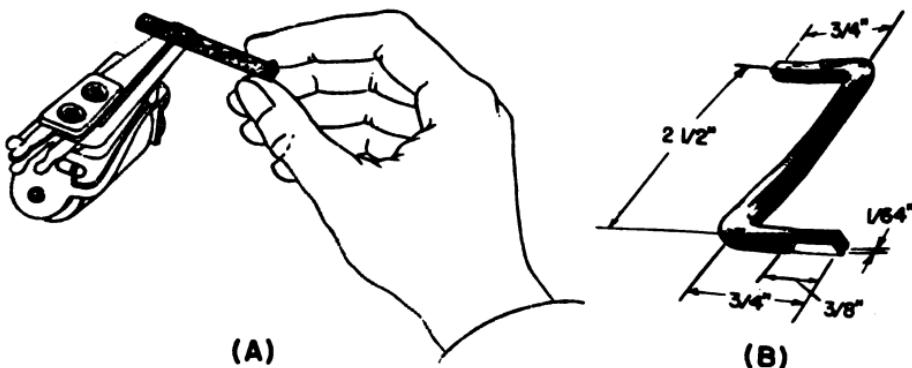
(A) Relay burnishing tool; (B) relay point bender.
